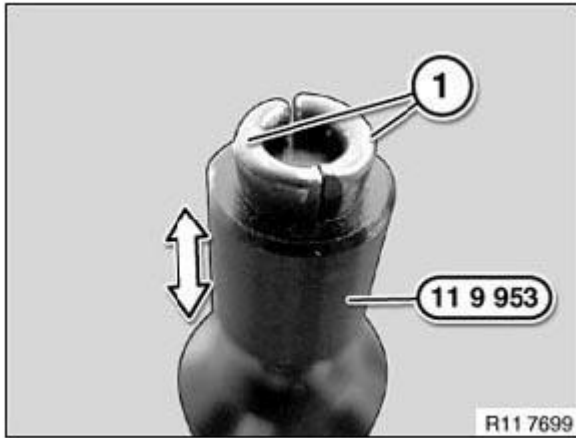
Identifying Cylinder Head On Special Tool
